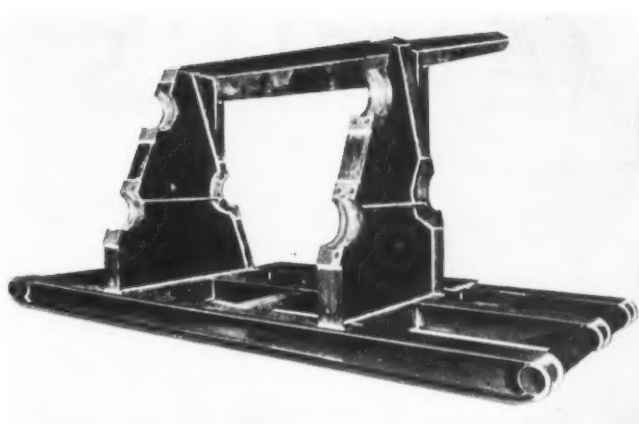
A Frame 18 Feet Long and Nearly 8 Feet Wide and High Welded by the Use of the Manipulator. The White Lines Indicate the Welds
